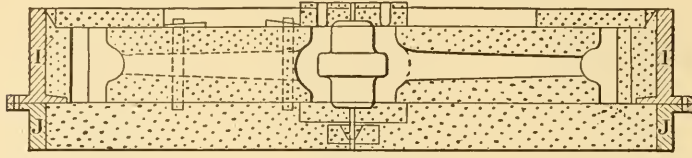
SECTIONAL VIEW OF MOLD ON LINE X X OF FIG. 270.
